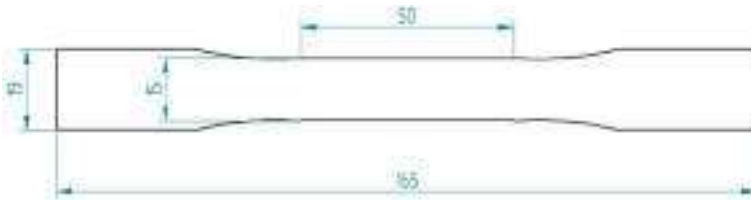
Dimensions of tensile test specimen as per ASTM D638 (in mm)
